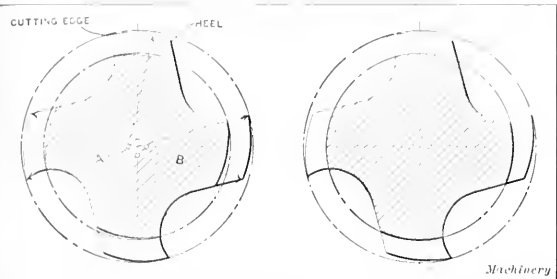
Cross-section of Tap relieved both on Top and in Angle of Thread. Fig. 2. Cross-section of Tap relieved on Top but not in Angle of Thread
